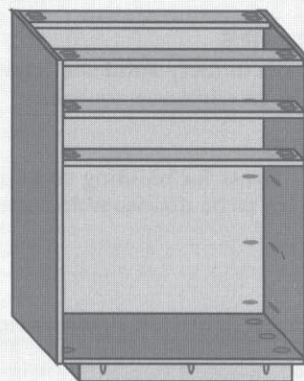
All pocket holes are placed on the under or back side except the top braces, which will be covered by the countertop.
